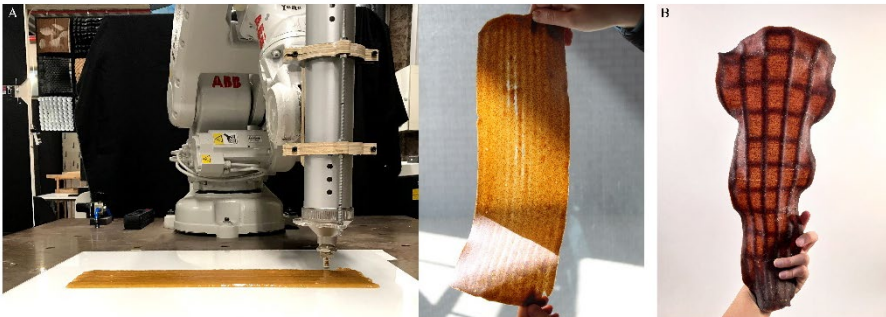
Robotically Extruded Seaweed Biocomposite Outcomes
